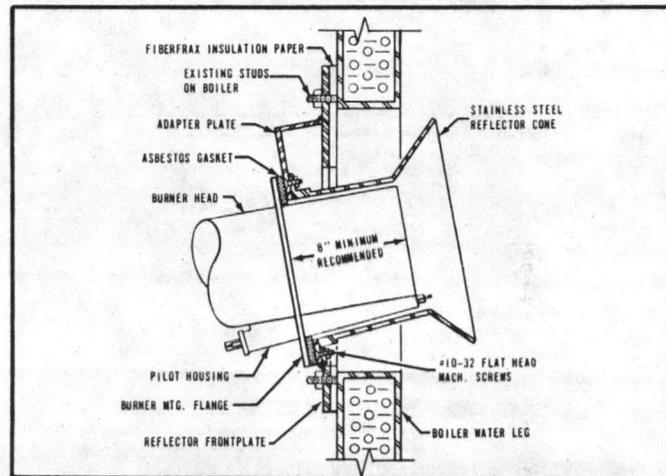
TOP VIEW REFLECTOR FRONTPLATE THROUGH RIGHT HAND FIRING DOOR
